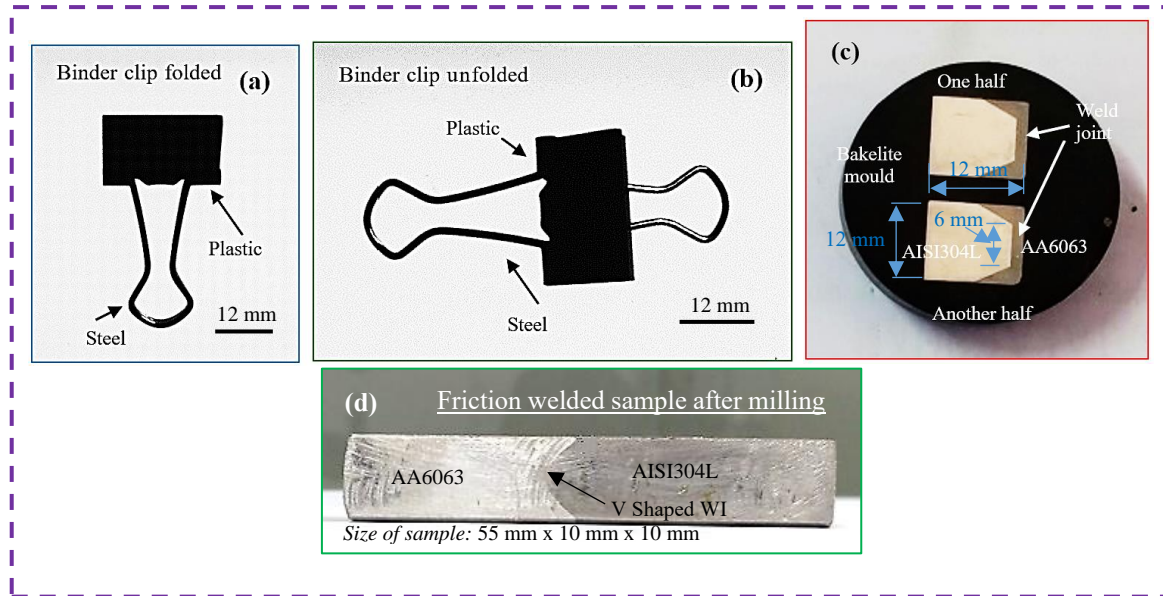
Input original images of samples. a) Binder clip folding case, b) Binder clip unfolding case, c) dissimilar friction weld joint, d) dissimilar weld sample for edge and defects detection, image taken by mobile camera.
